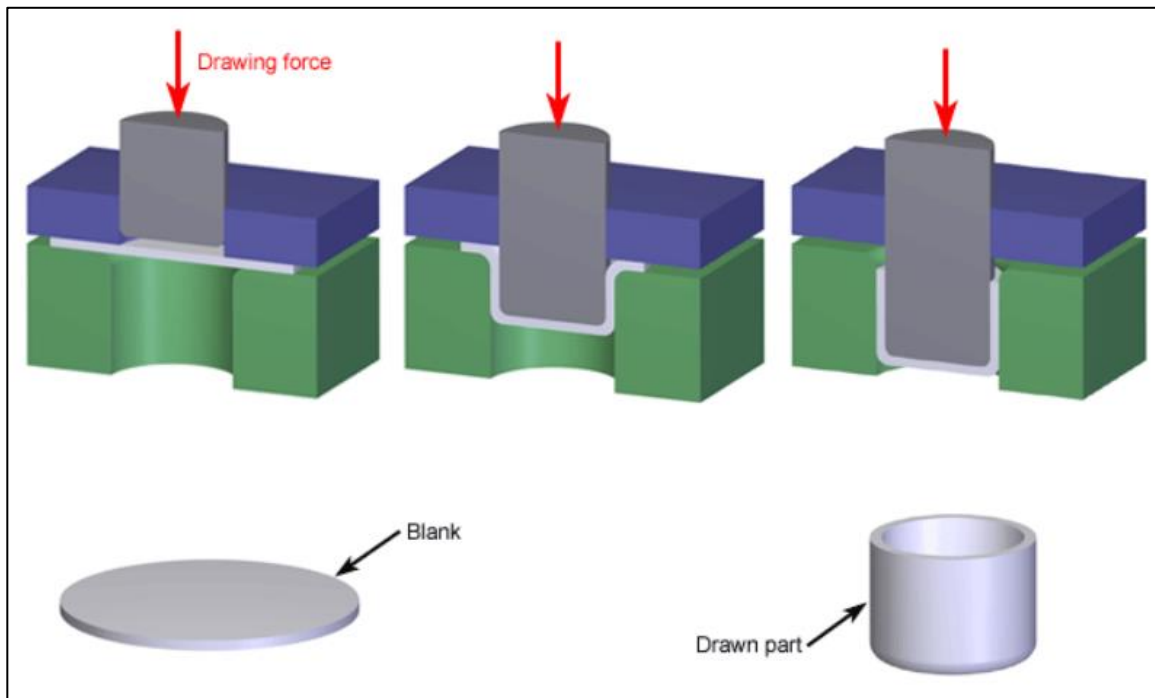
A complete deep drawing process to get a final product [Custompartnet.com, 2018]
